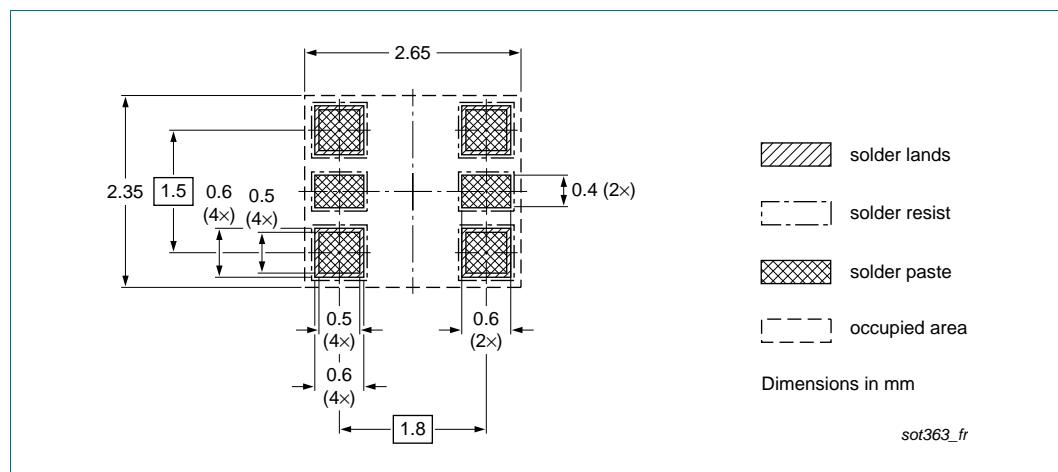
Reflow soldering footprint PUMD2 (SOT363)
